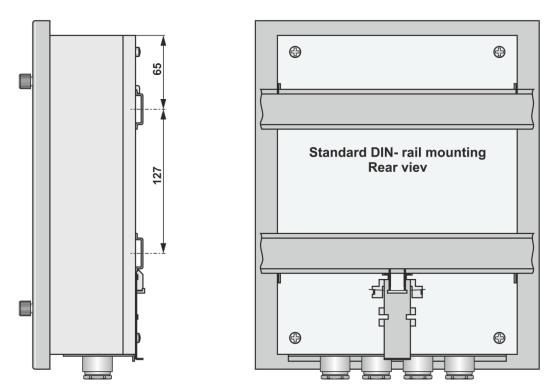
Mechanical dimensions, DIN-rail mounting, in mm
